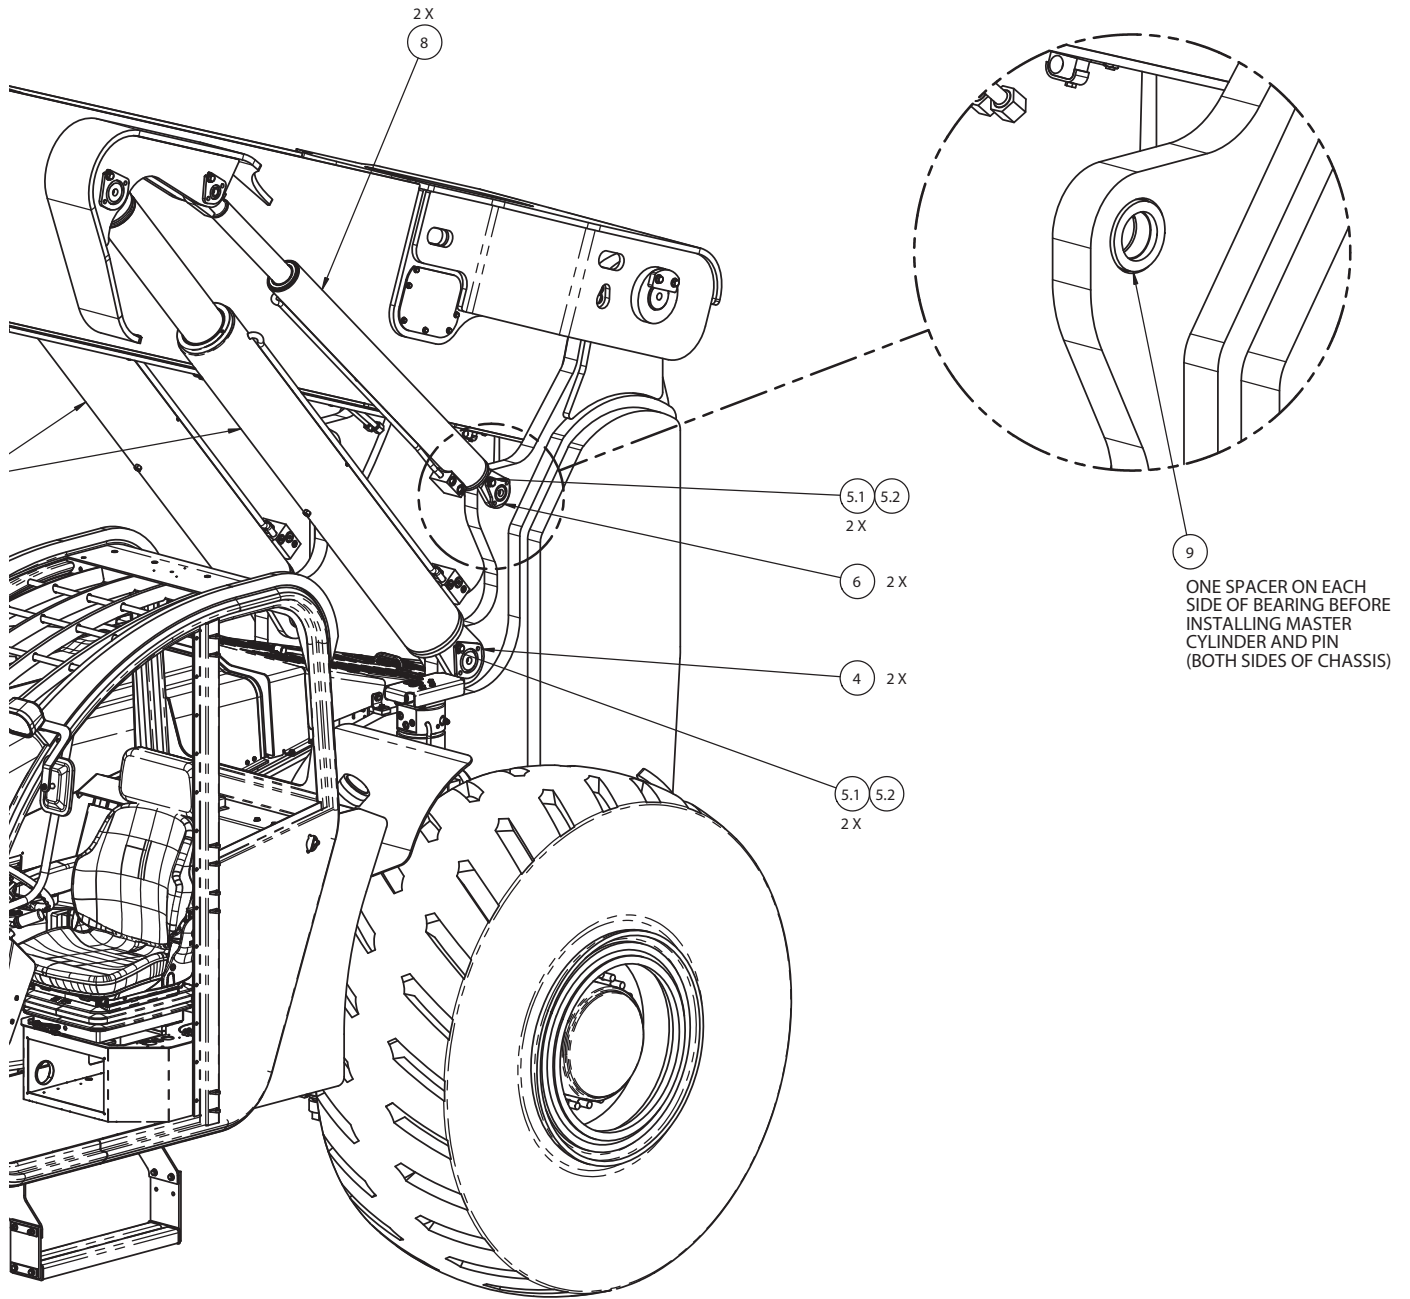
FINAL ASSEMBLY (32000-000)
